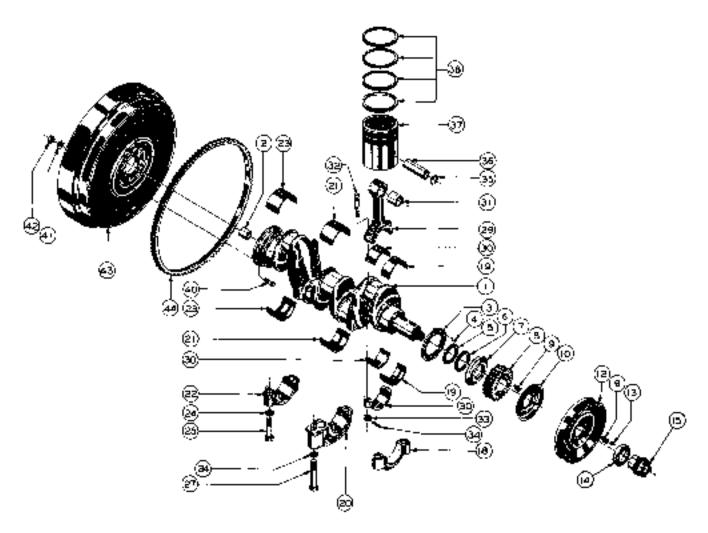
CRANKSHAFT, FLYWHEEL, CONN. RODS AND PISTONS
